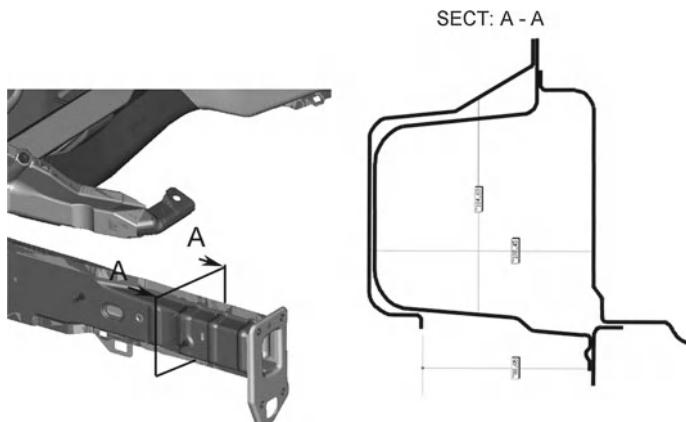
In the digital mock-up environment, dimension measurement is easily made, to check for part geometry or gaps (redrawn from Morello et al. 2011)
